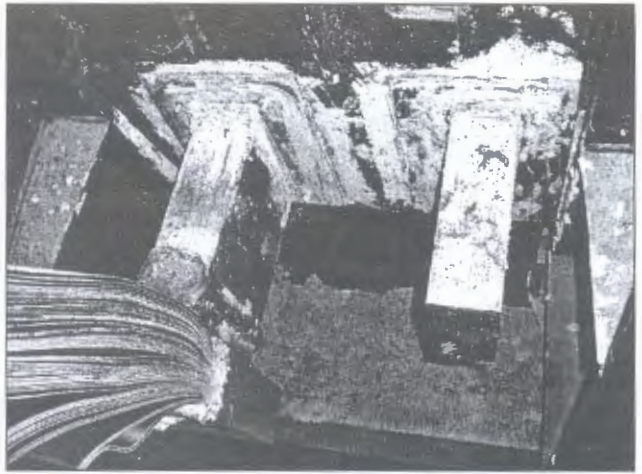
Plate-blooms joint before (on the right) and after welding (on the left)
